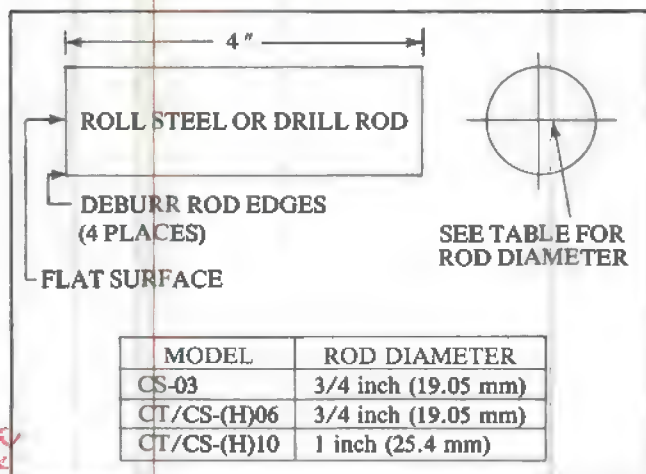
Disassembly Tool to Remove Seat (19) from Body (21)
